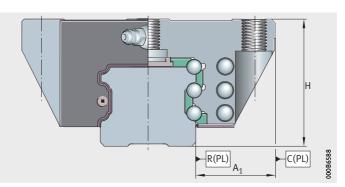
Datum dimensions for accuracy Units with Corrotect coating
